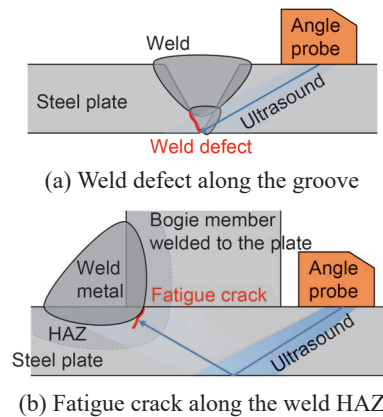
Examples of inclined surface flaws generated in the welded part of steel plates in bogie frames
